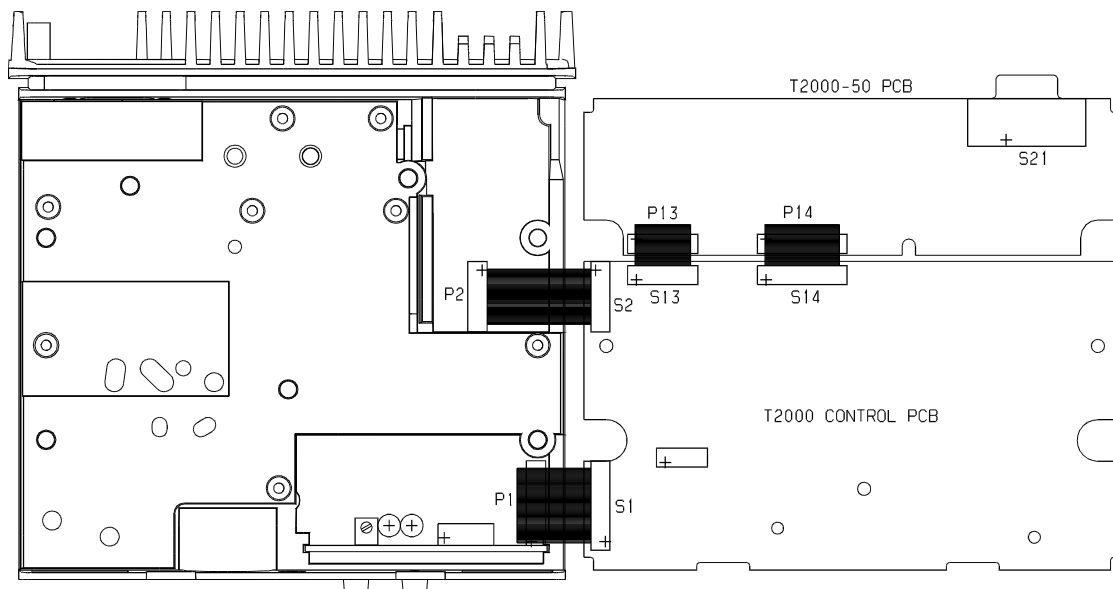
T2000-50 Handsfree PCB Mounting
